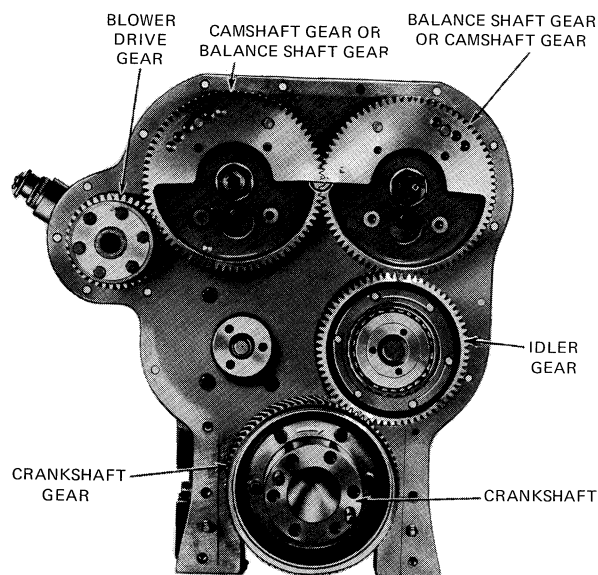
End view of Series 71 diesel engine timing gears.
